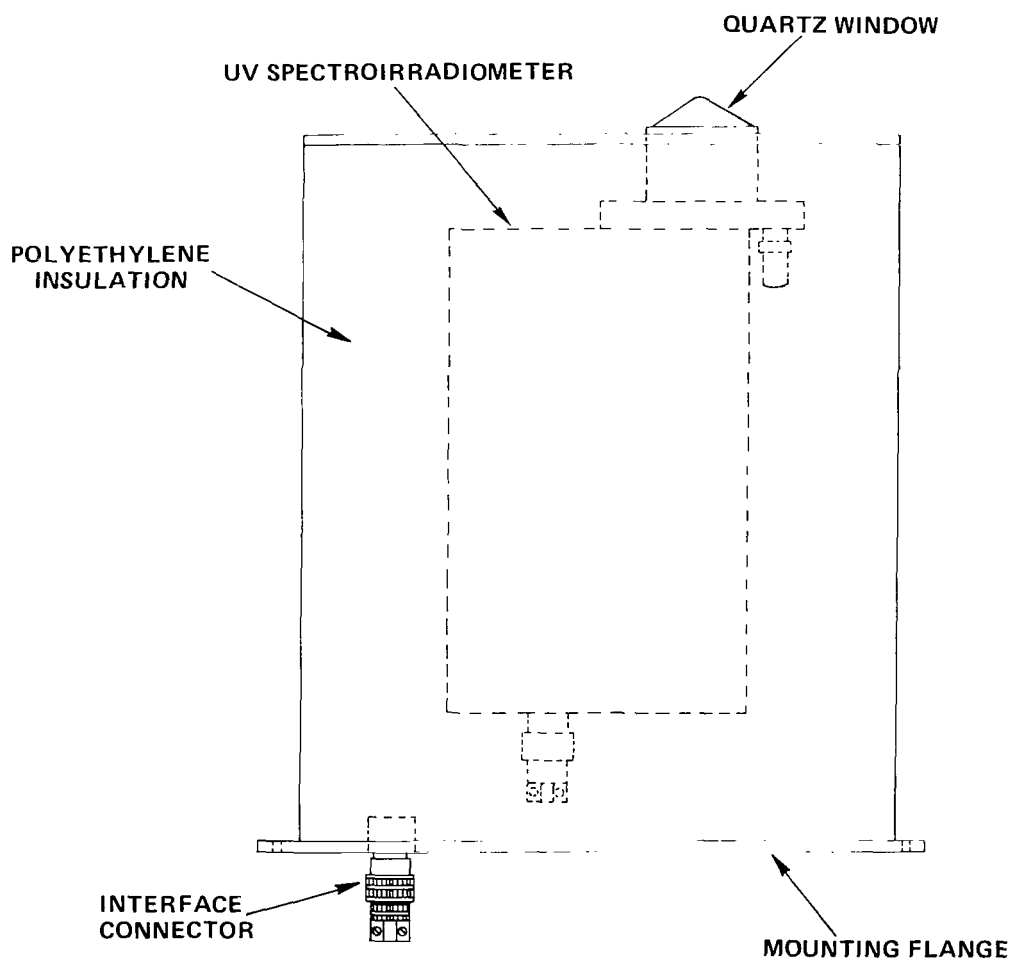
Cross-sectional drawing of the cylindrical housing of the UV spectroirradiometer.
